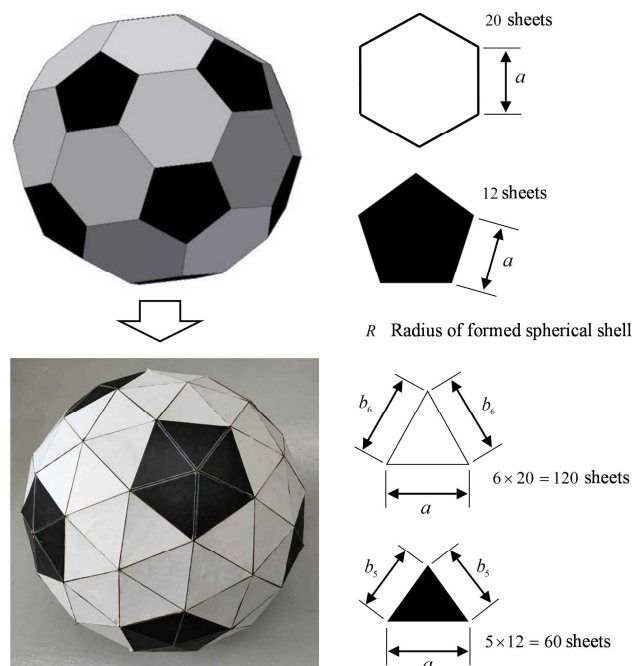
Soccer-ball-type and triangle-type preformed boxes using the IHBf method [26, 28].
